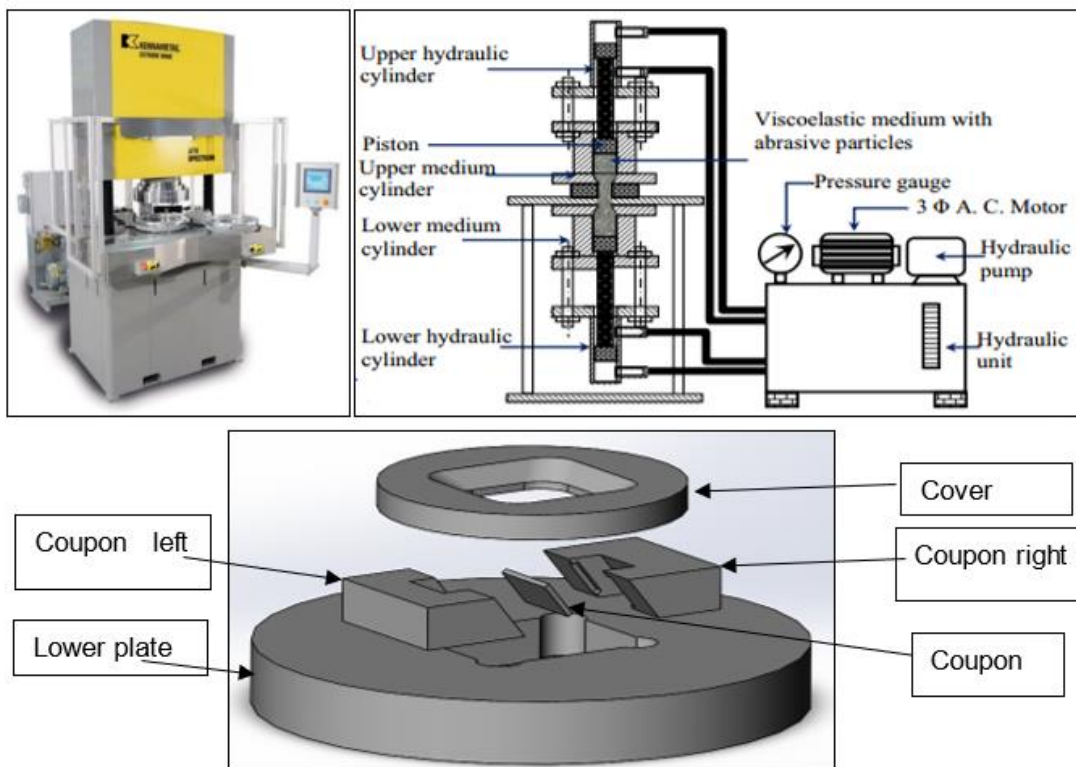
AFM machine (top left); working schematics (top right); undergoing coupon with fixture for experimental trials (bottom)
